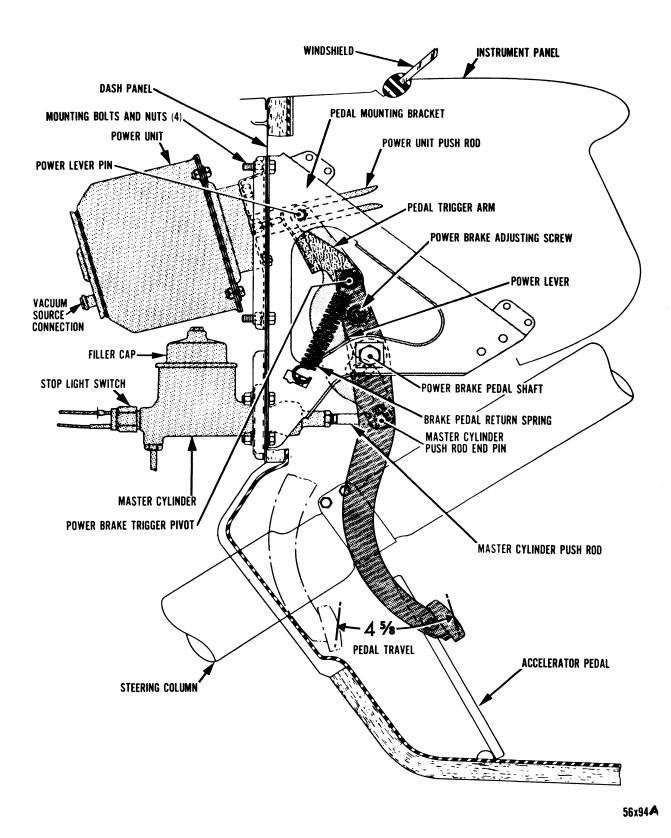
Power Unit and Linkage Installation (Piston Type)
